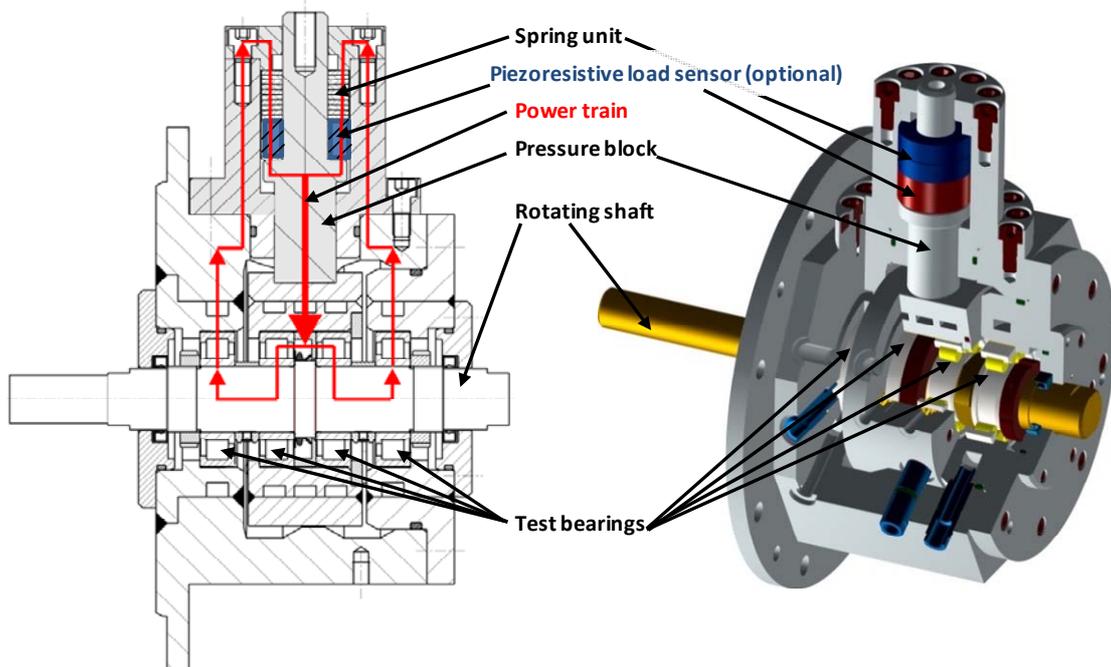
Test head of four cylinder roller bearing test rig ($d_{shaft} = 30 \text{ mm}$).
